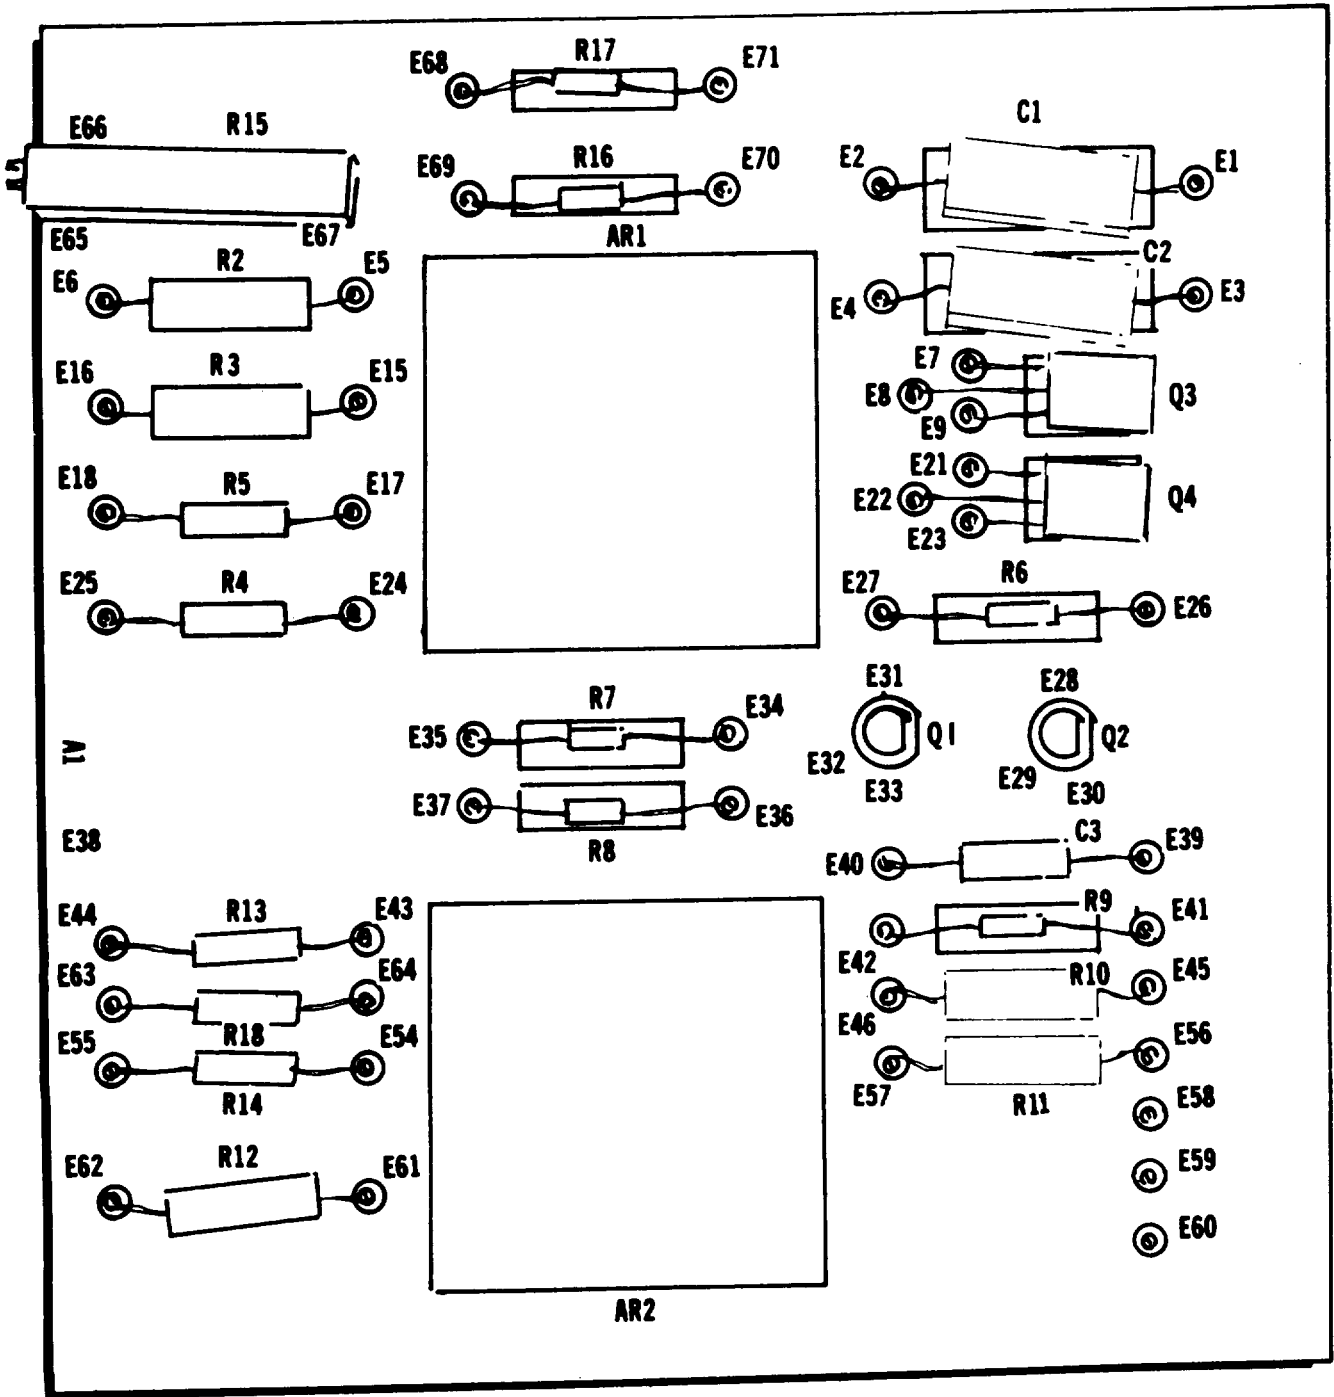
Component Board A-1, Rear View (Sheet 2 of 2)
